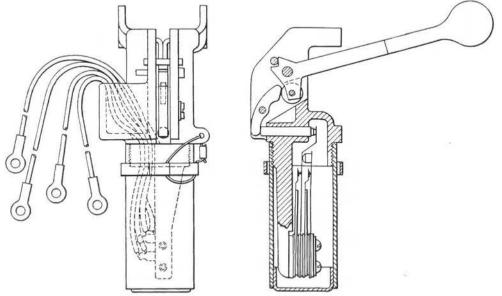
Switchhook assembly and enclosing cover with the new subscriber sets
